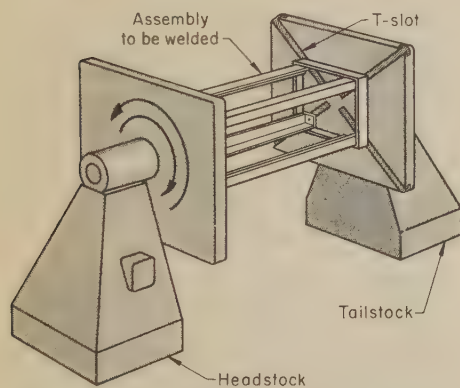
Headstock-and-tailstock positioner that holds and rotates bulky assemblies
